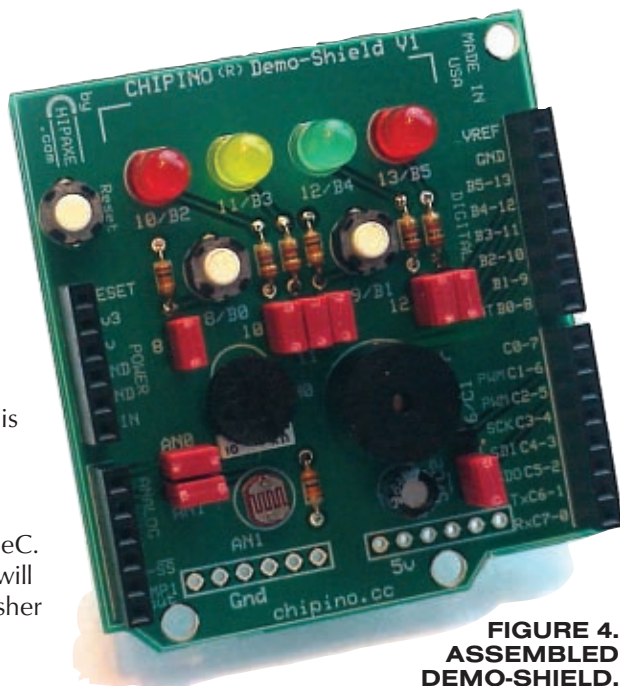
ASSEMBLED DEMO-SHIELD.
